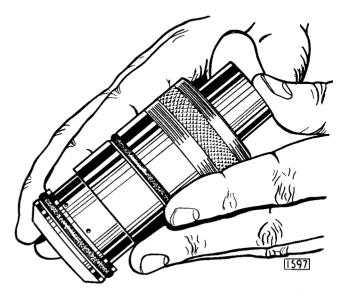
Fitting the accumulator piston (Tool No. L.179).
